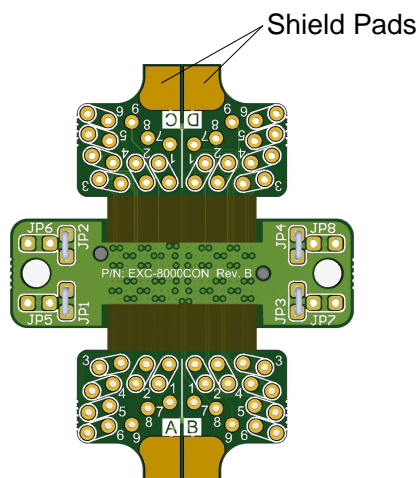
EXC-8000CON Assembly – Rear View with Soldering Holes
